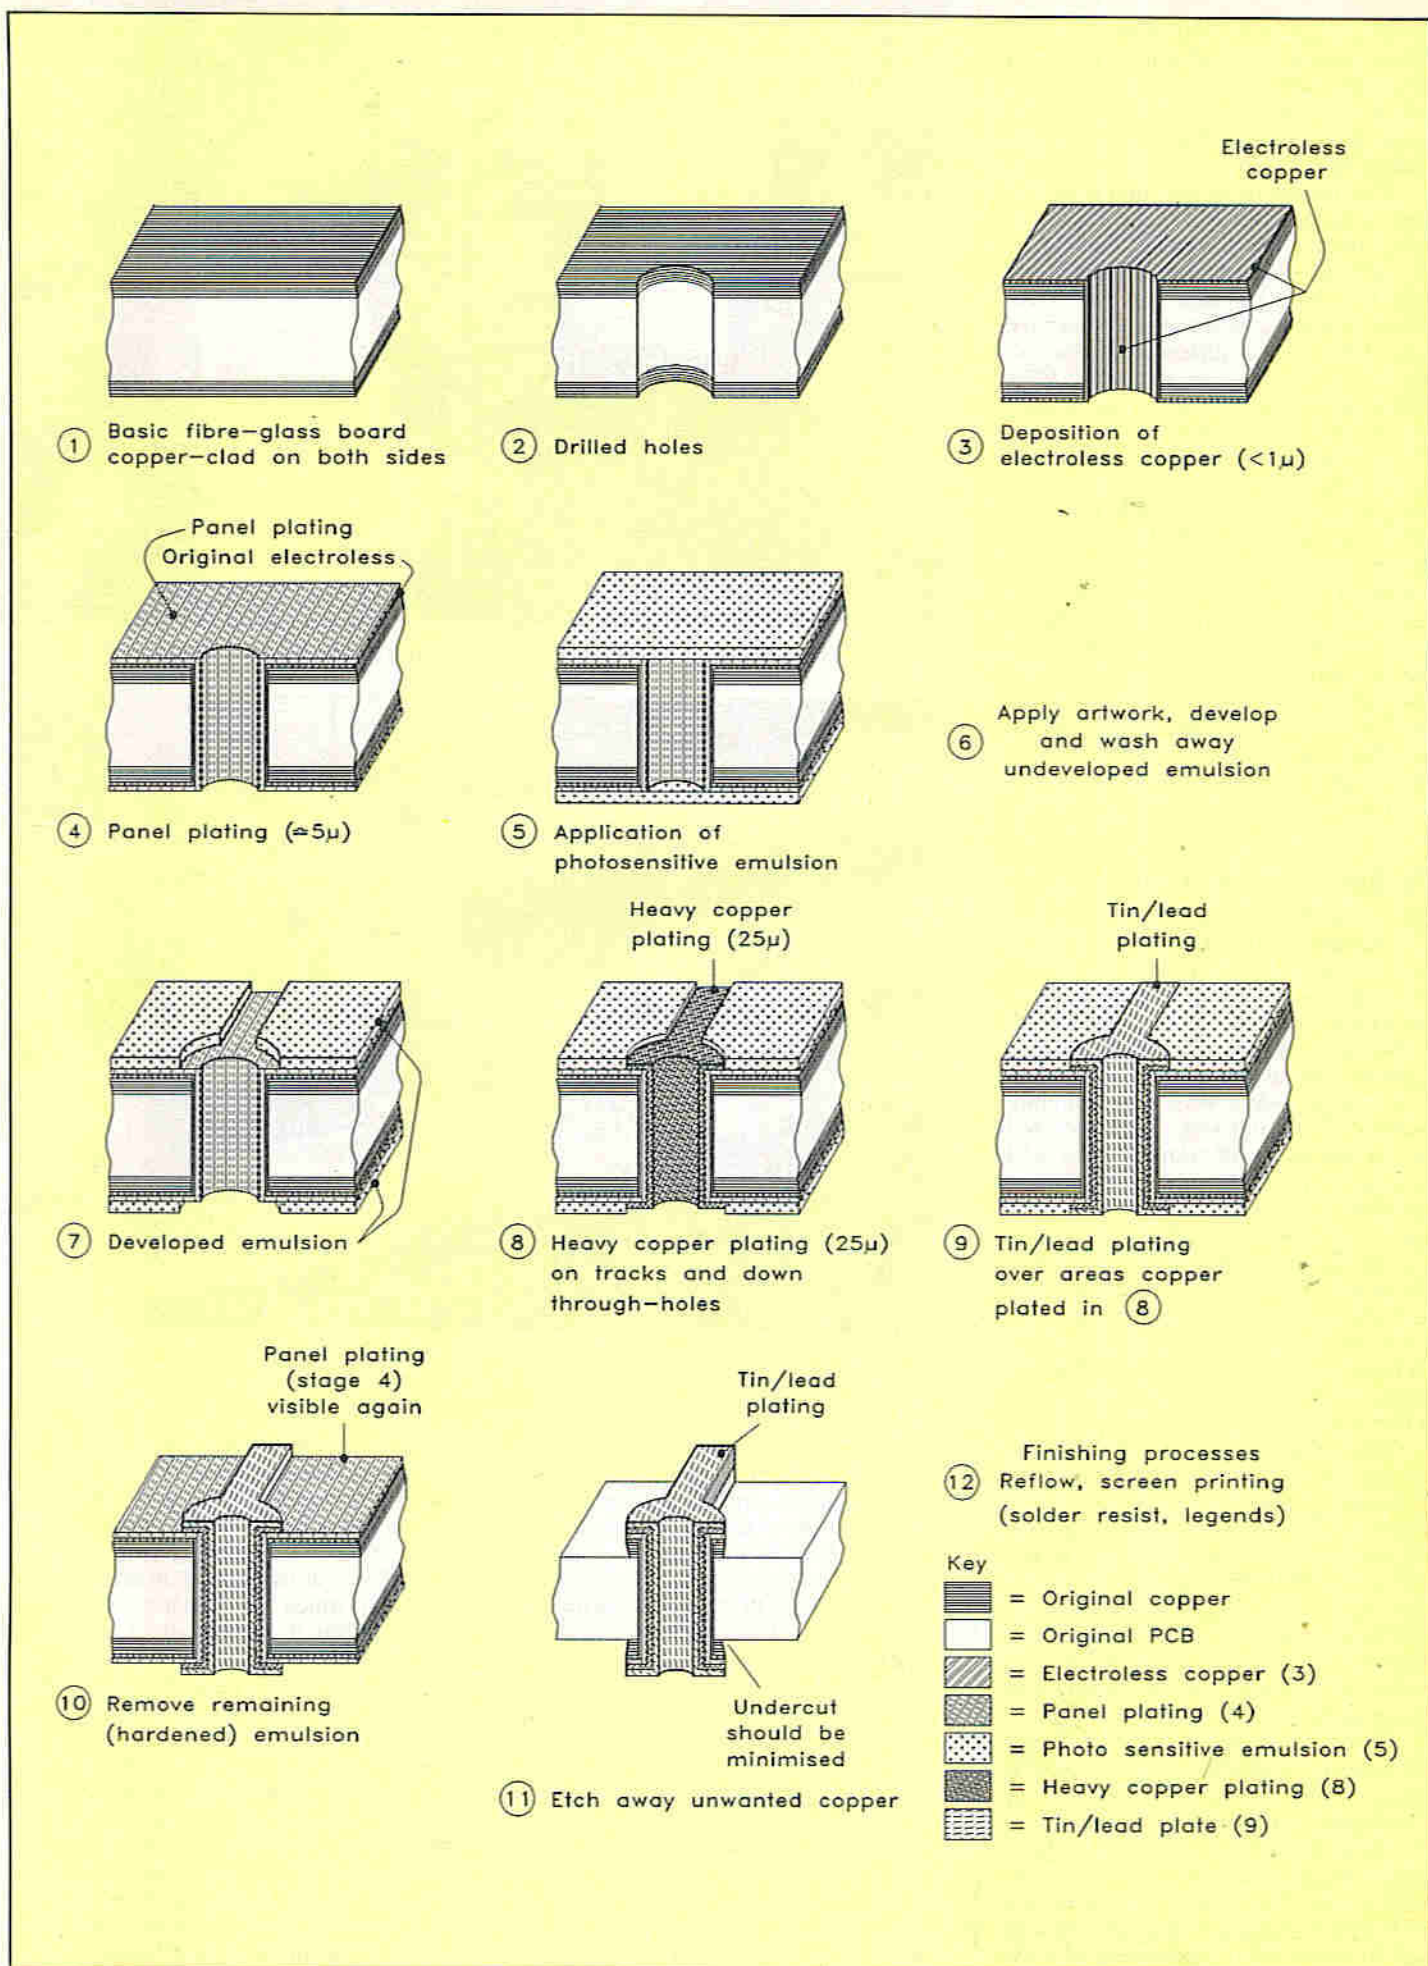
The various stages that take place during the manufacture of a PTH PCB.
